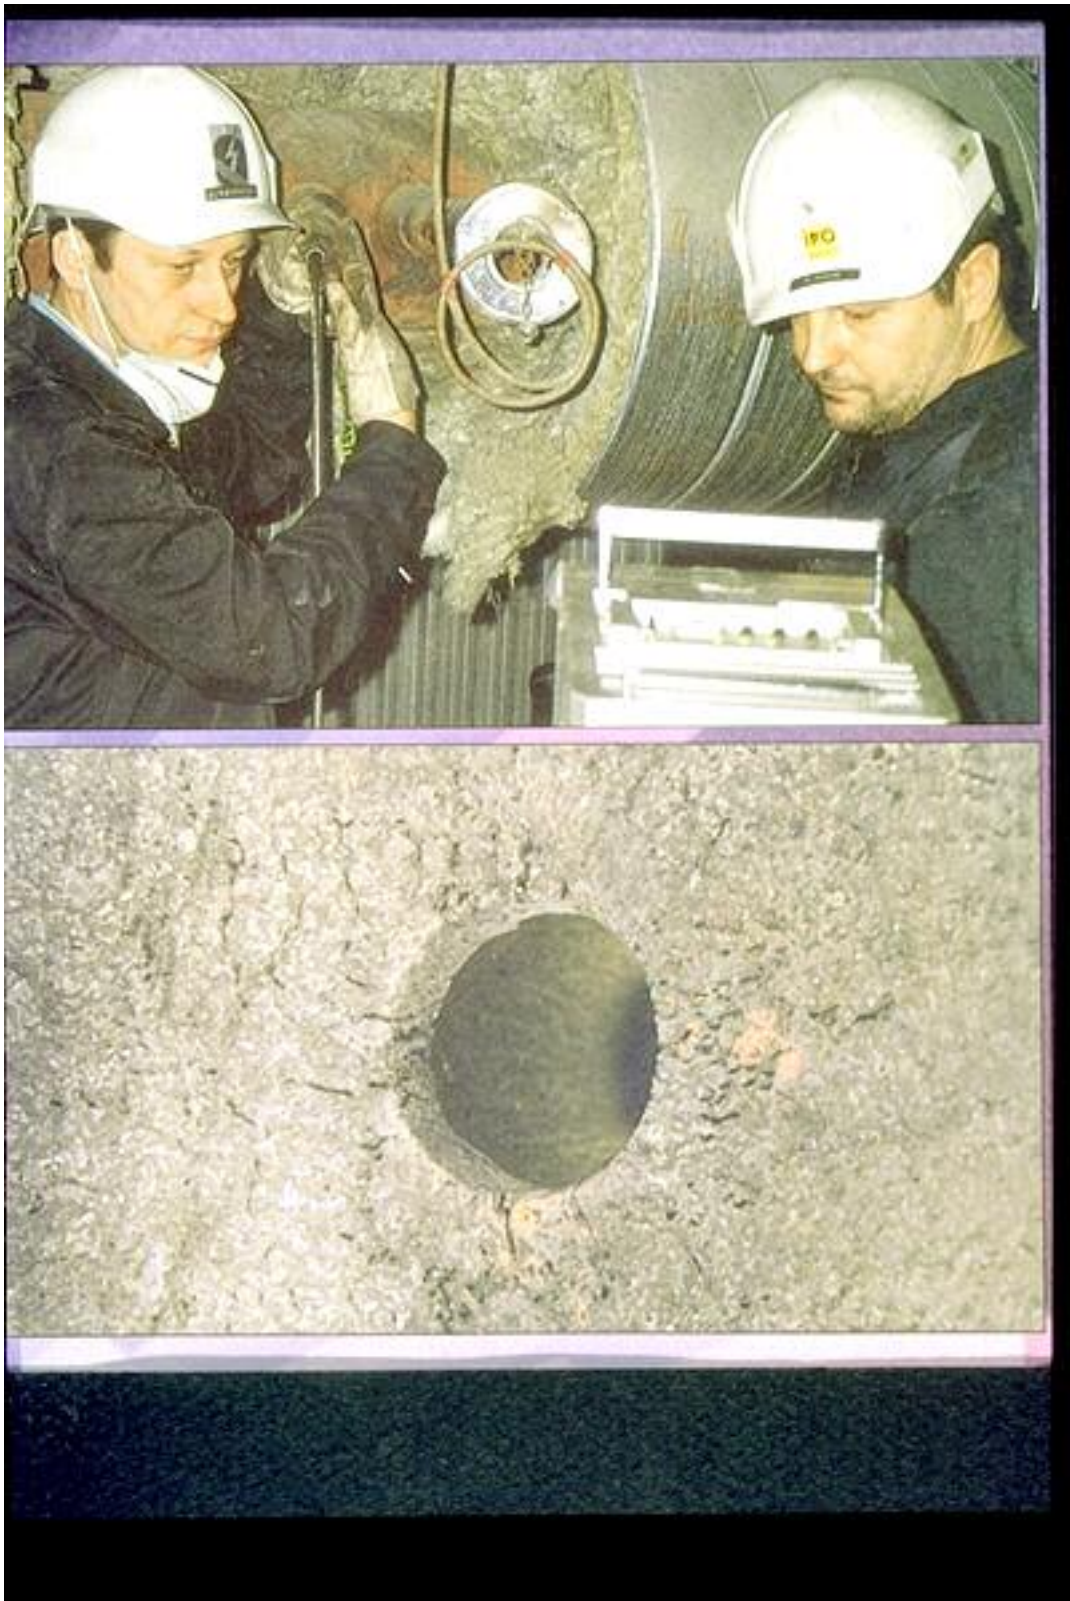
Endoscopy of a steam turbine via a pre-manufactured endoscopy hole
